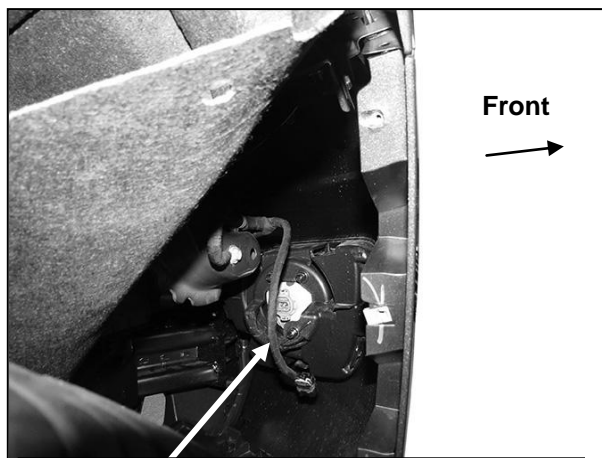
Remove hardware attaching plastic fill panel to inner fender (arrow)
